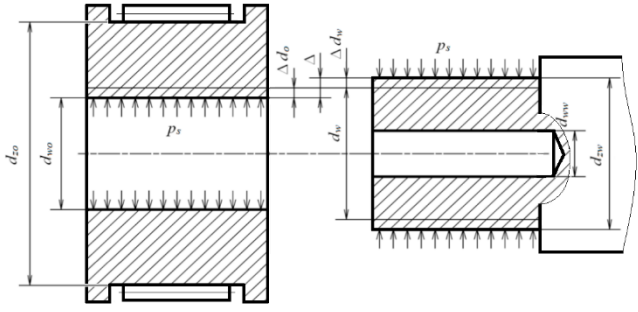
The model for determining the contact pressure in the interface between the toothed pulley and the crankshaft journal
